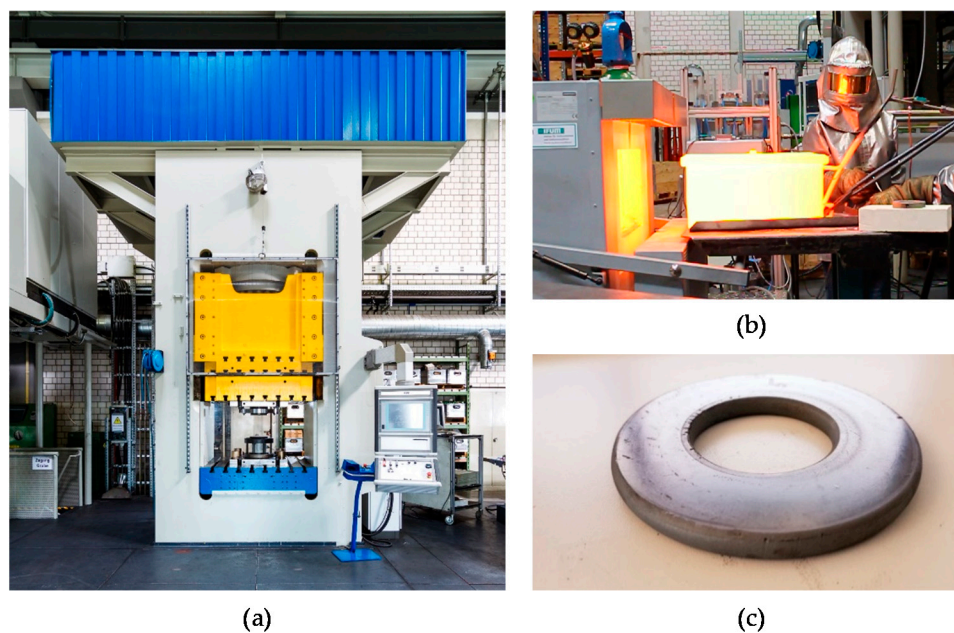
Forming setup: (a) hydraulic press; (b) removal of the shielding gas container from the furnace after heating of the workpieces; (c) forged bearing washer.
